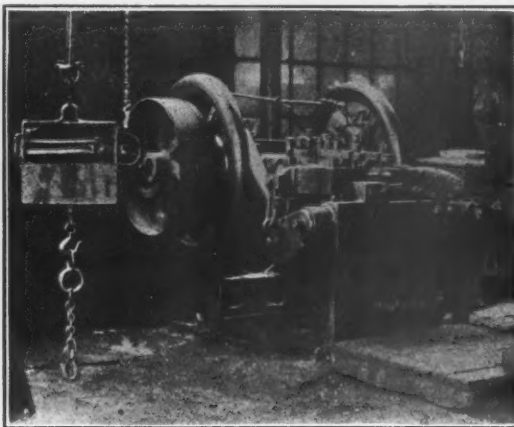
FORGING MACHINE AND SCALE ON THE HOIST FOR WEIGHING BOLTS.
